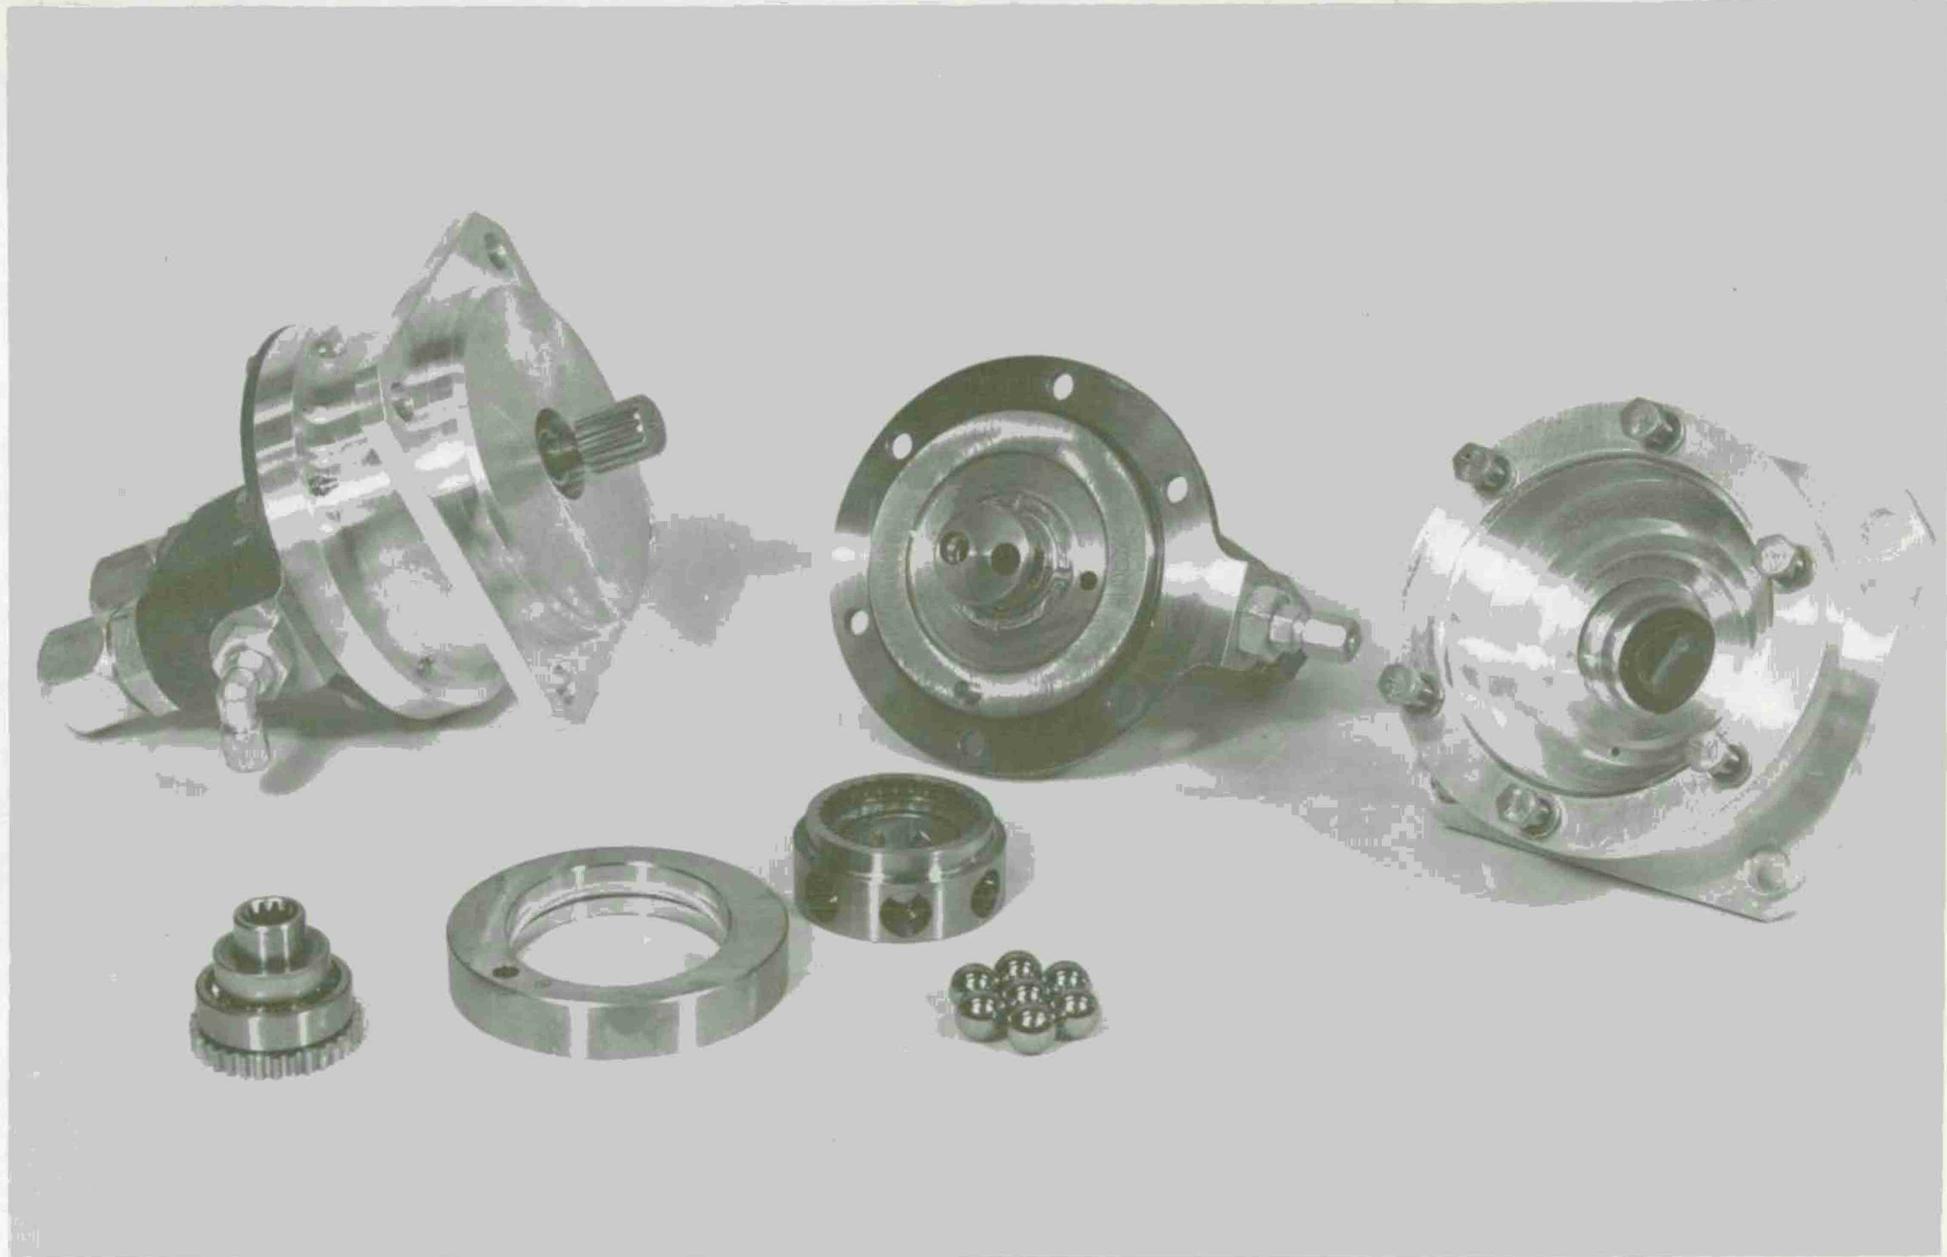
MOTOR ASSEMBLY AND COMPONENTS
